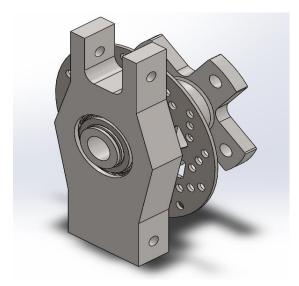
Rear Wheel Assembly Without Tyre (CAD)
